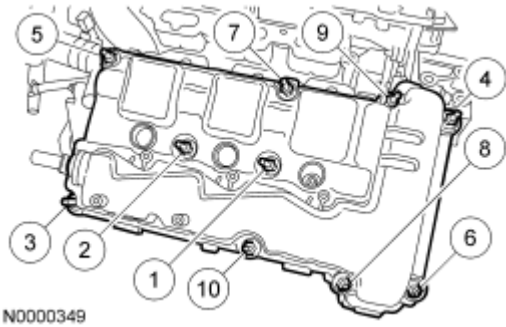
Identifying Tightening Sequence Of Valve Cover Stud Bolts
